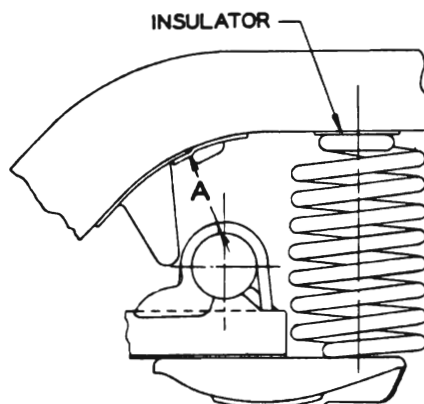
Rear Spring Trim Dimension—Series 90
